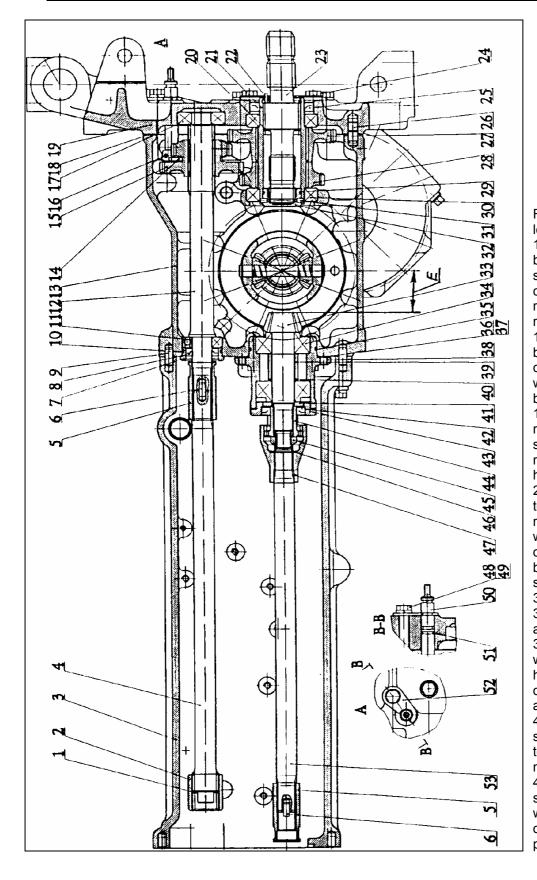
Rear axle longitudinal section 1- ring; 2- sleeve; 3body; 4- shaft; 5sleeve; 6- pin; 7cover; 8- sealing; 9retaining pin; 10- oring; 11- ball bearing; 12- shaft; 13- rear axle body; 14- fork; 15compact toothed wheel; 16- pin; 17- ball bearing; 18- sealing; 19- rear cover; 20retainer ring; 21sleeve; 22- retainer ring; 23- PTS end; 24housing; 25- sealing; 26- retaining pin; 27toothed wheel 540 rpm; 28- toothed wheel 1000 rpm; 29o-ring; 30- conical bearing; 31- pin; 32stopper; 33- pinion; 34- conical bearing; 35- o-ring; 36adjustment washer I; 37- adjustment washer II; 38- pinion housing; 39distancing sleeve; 40adjustment washer; 41- oil thrower; 42sealing; 43- cover; 44toothed sleeve; 45nut; 46- retaining ring; 47- tooth clutch; 48screw; 49- spring washer; 50- shaft; 51o-ring; 52- retaining plate; 53- drive shaft;
